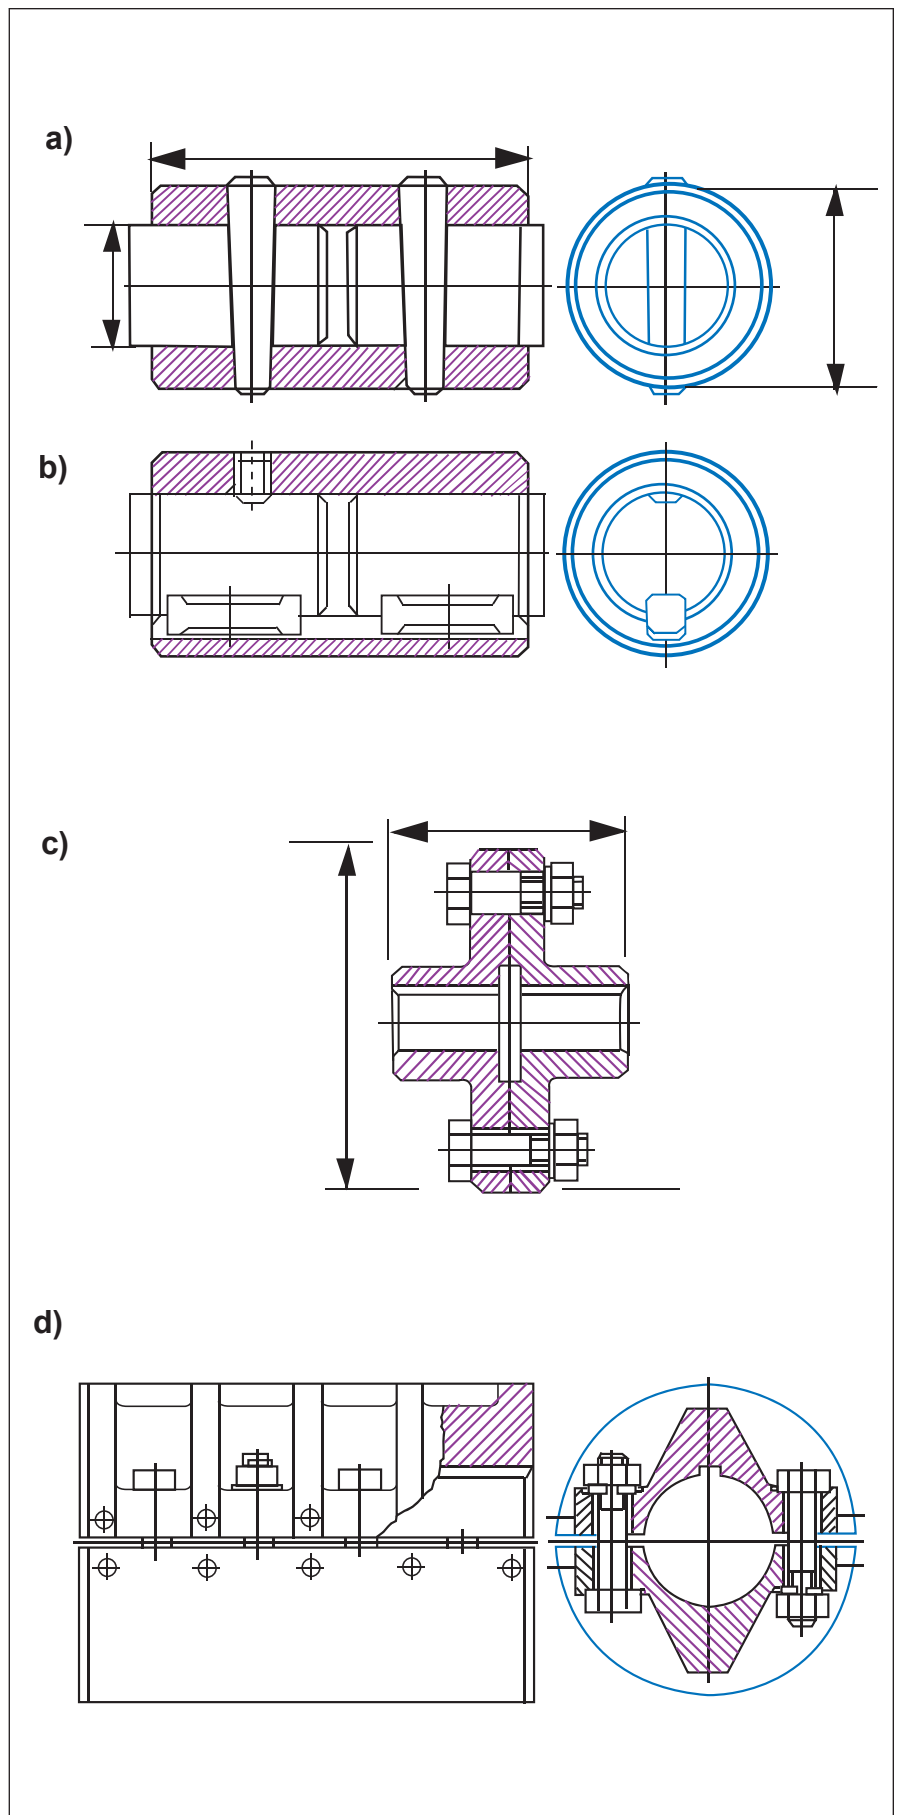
Typical designs of rigid couplings: simple designs, which transmit torque by pins (a) or keys (b); flange couplings (c) and split-flange designs (d).
